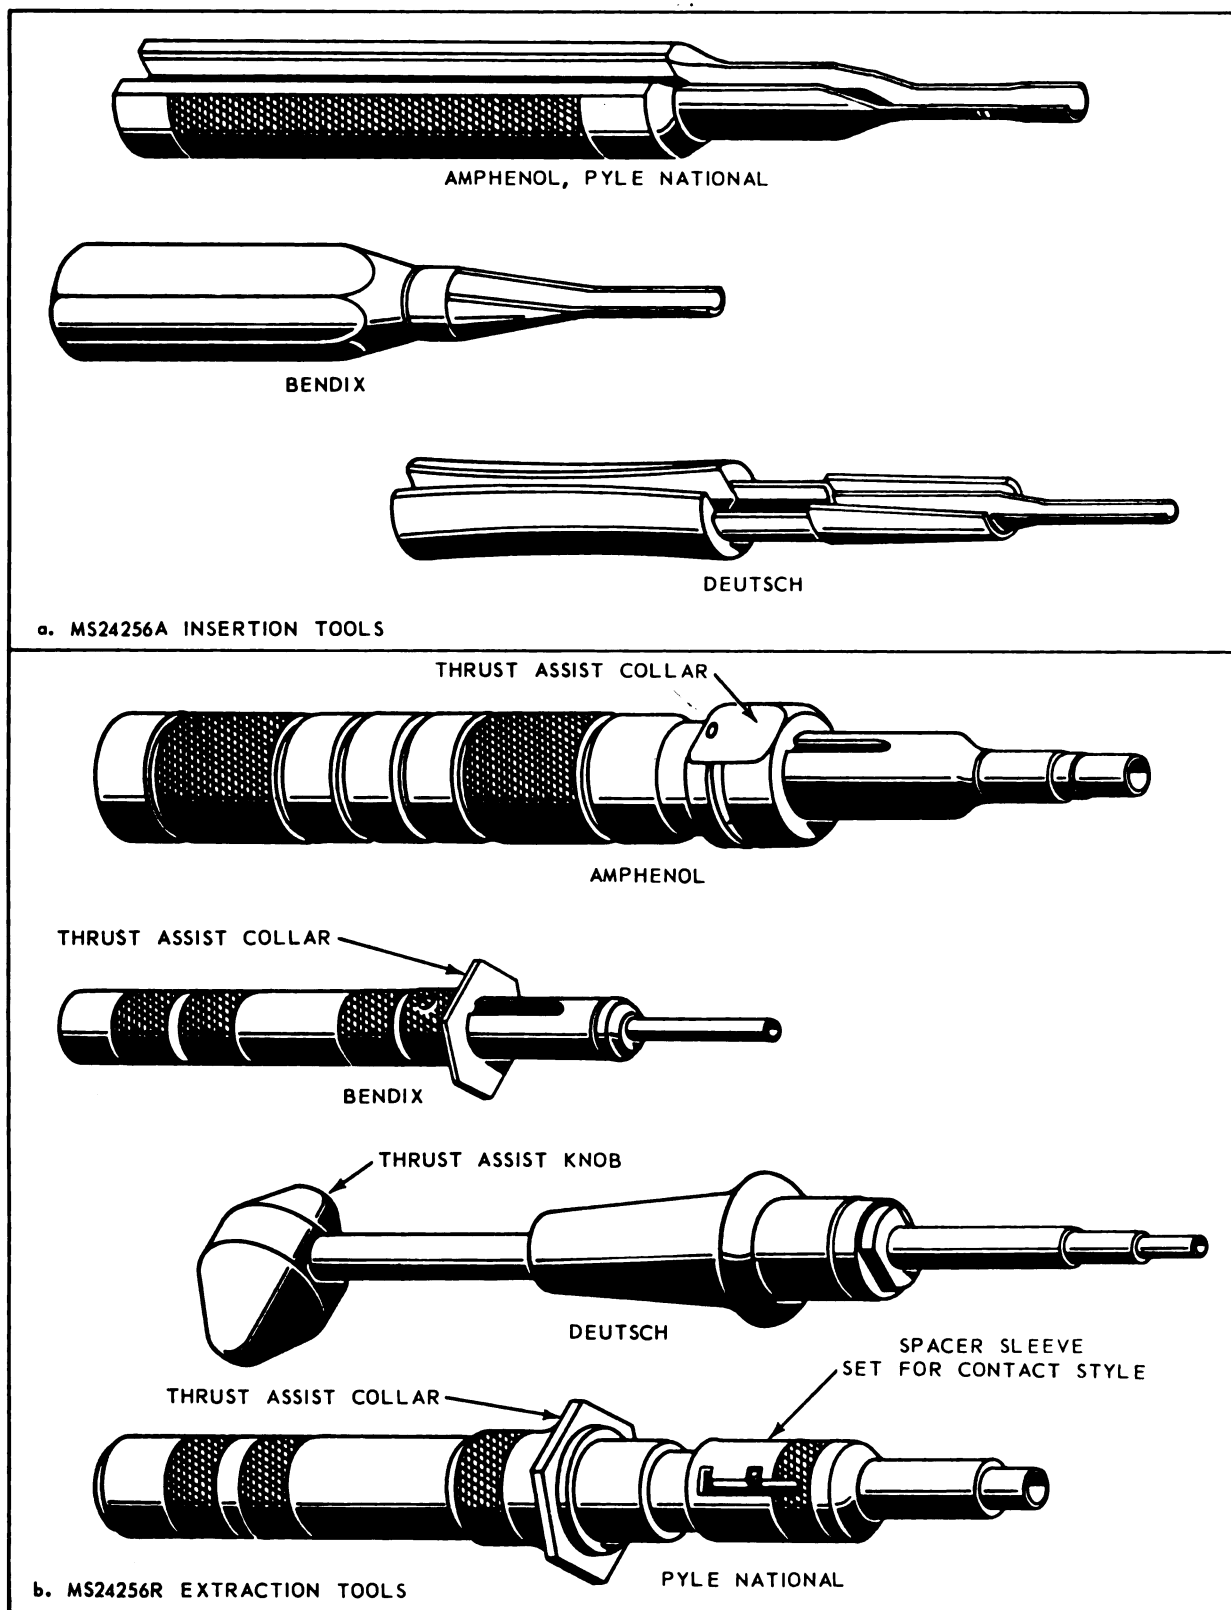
Insertion and Extraction Tools for Crimp-Type Contacts
